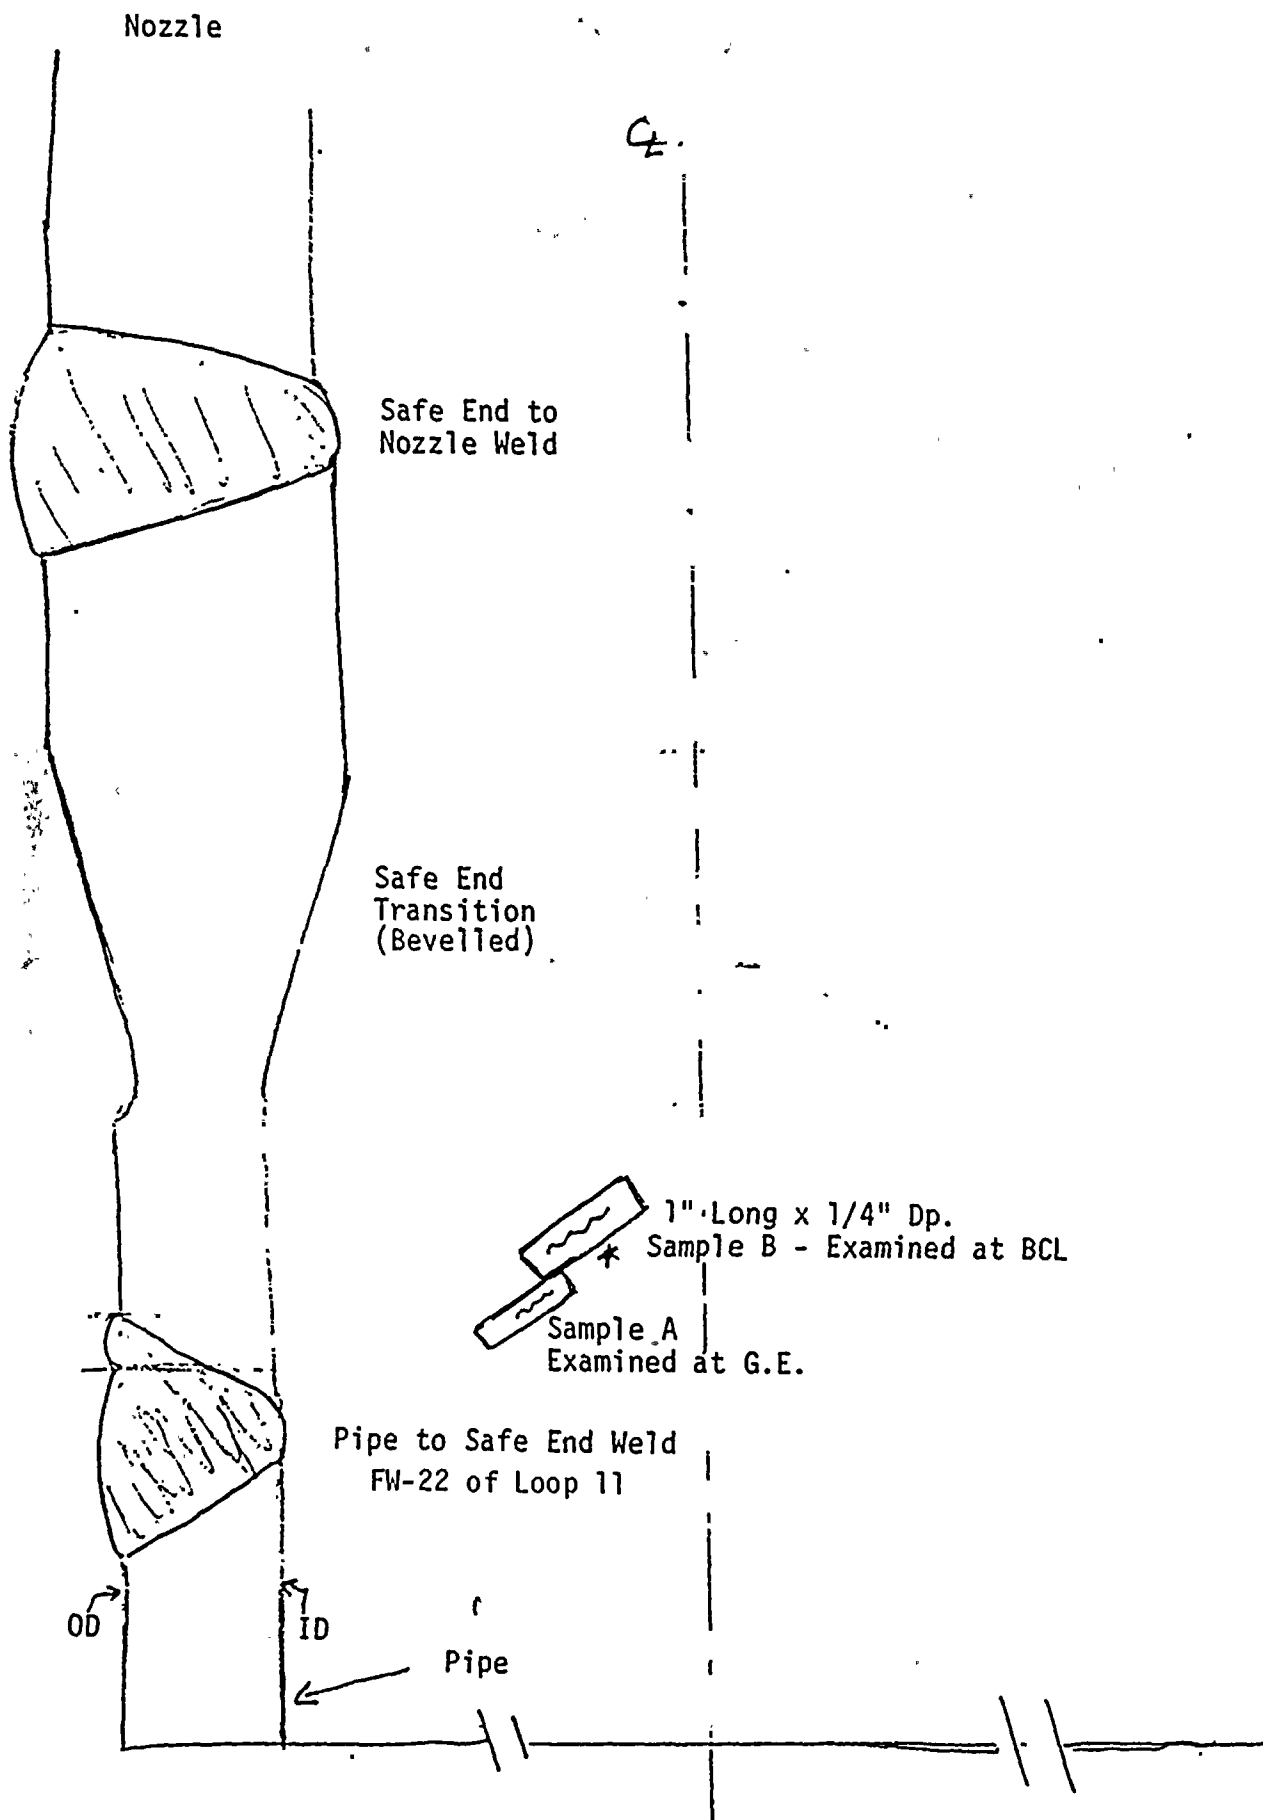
Schematic Showing the Location of the Safe End Weld Samples Examined at BCL (Section View), and GE - VNC.
